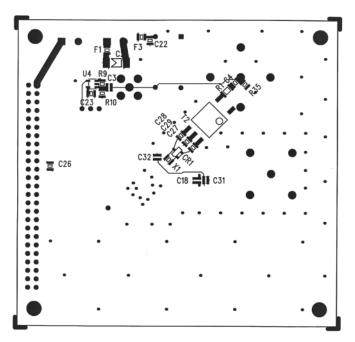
AD6644ST/PCB Bottom Side Silkscreen
